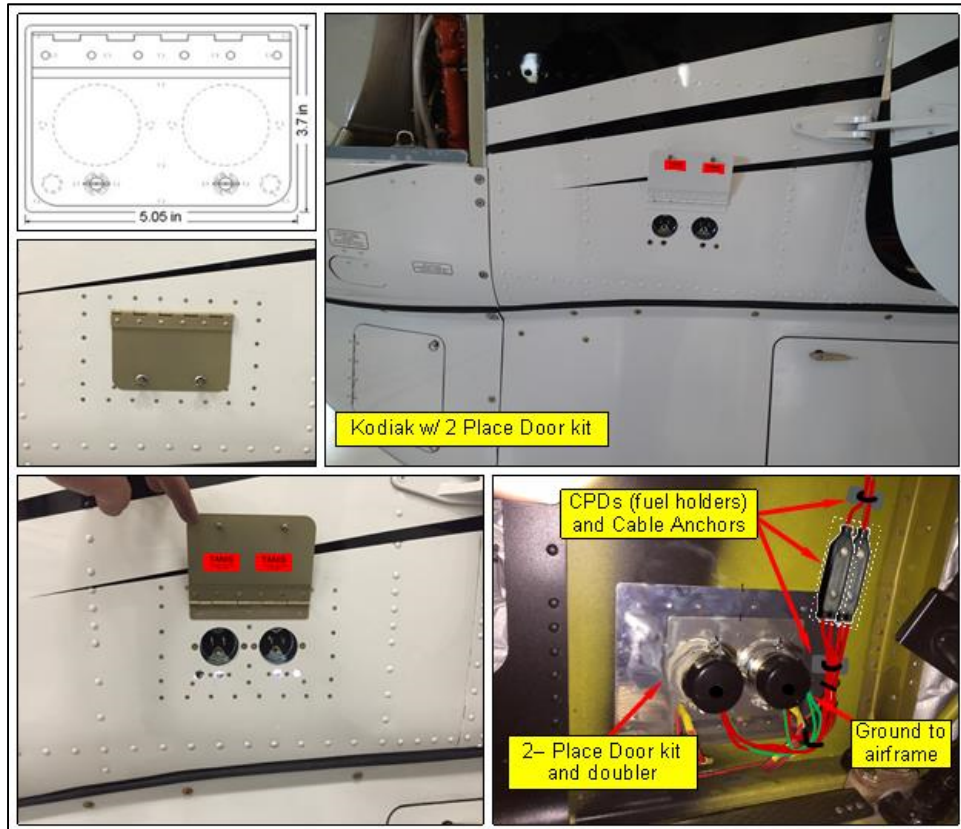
Door and Cable Kits: Example of 2 Place Door Kit p/n: TD03152 located forward of the pilot side door jamb with doubler. Door kit supplied, doubler field fabricated as needed refer to drawings: 03151 and 03152. Install wet with PS870 sealant or equivalent on all faying surfaces.
